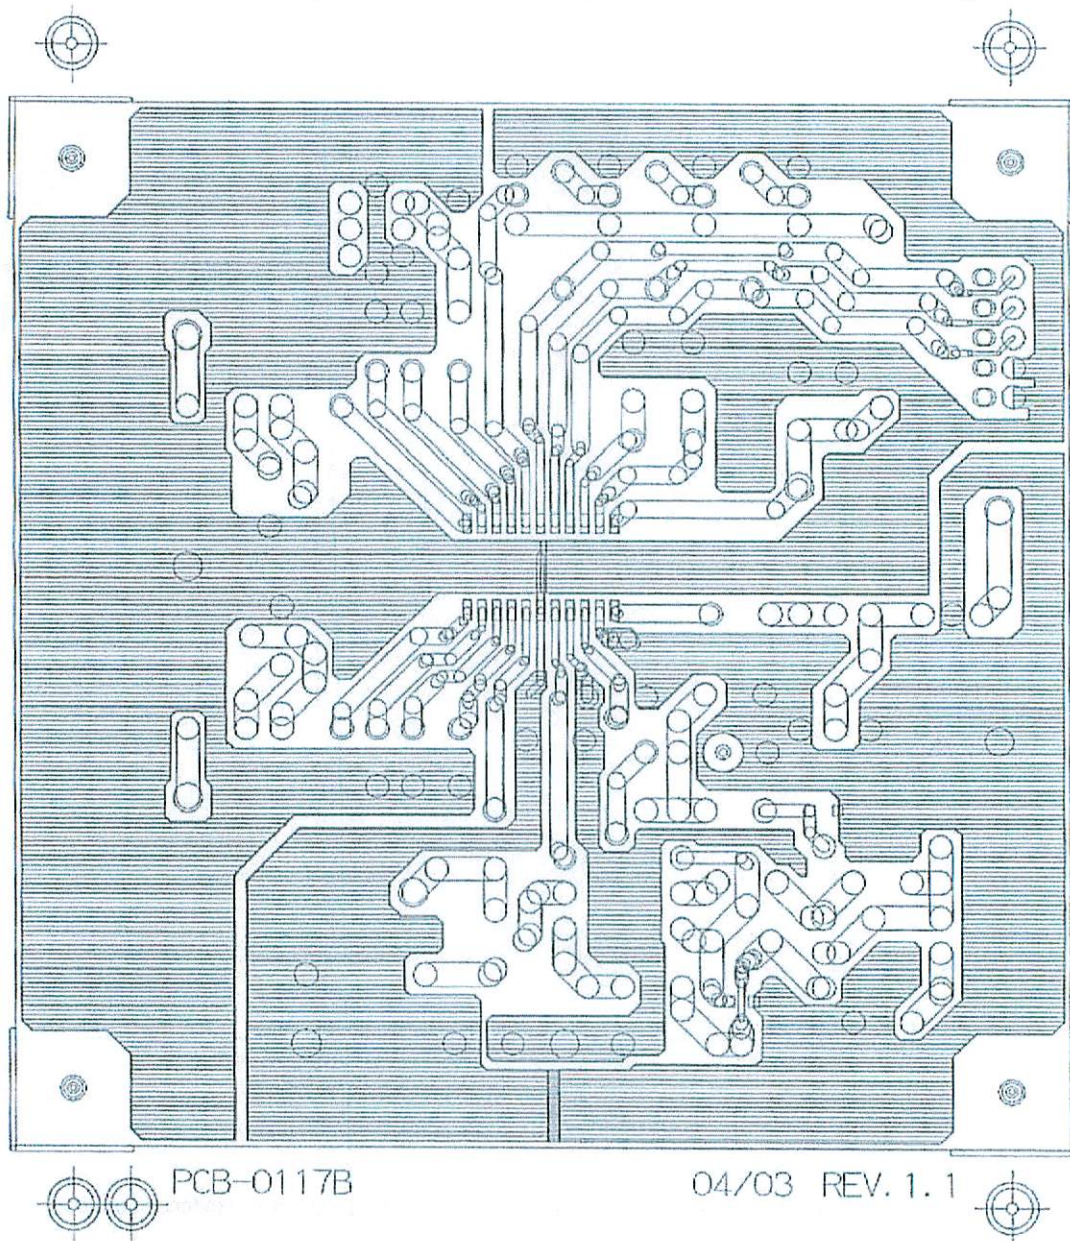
Evaluation board, soldered surface pattern (as viewed from soldered surface)
